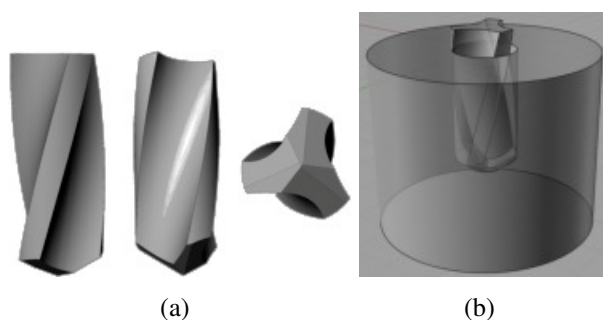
a) Analyzed drill design, b) assembly of the drill and PUR sample for FE analyses
